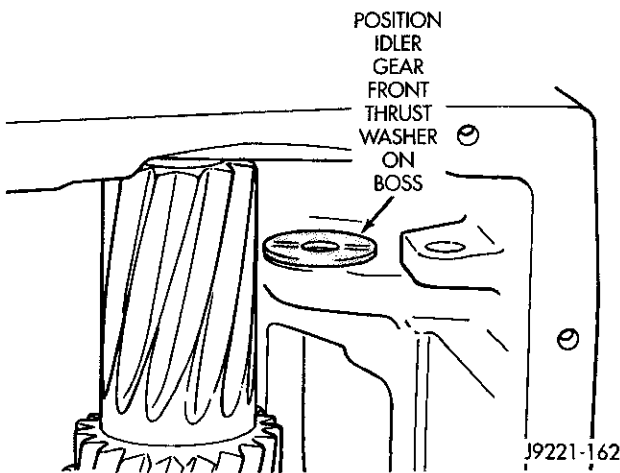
Positioning Idler Gear Front Thrust Washer In Case
